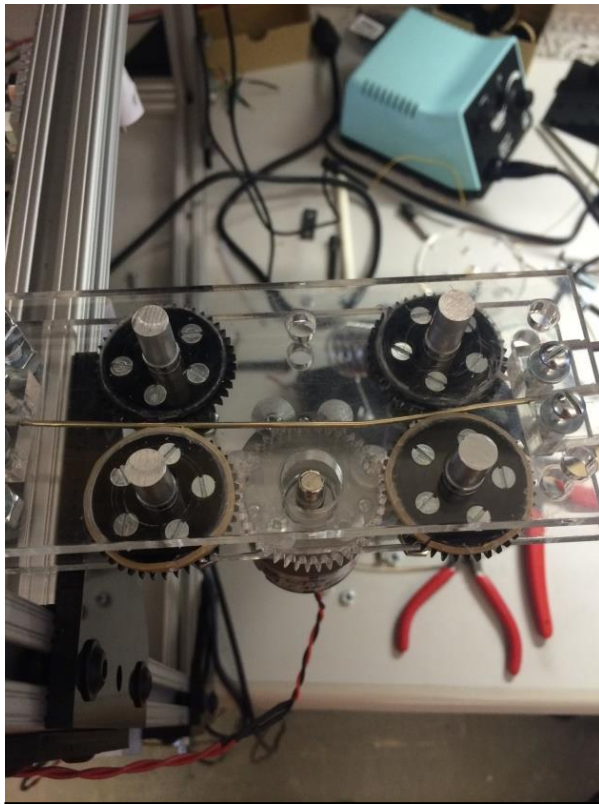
Top view of wire feeder with wire being fed through two sets of acrylic gears.
